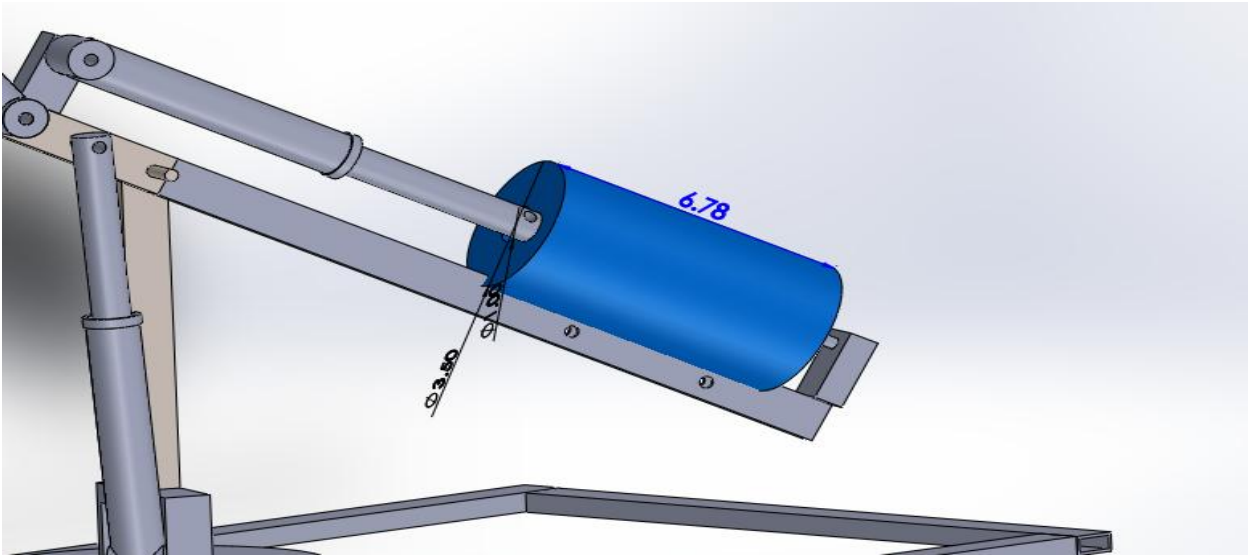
, Joint and Dimension of Counter Weight (Solid Works)
